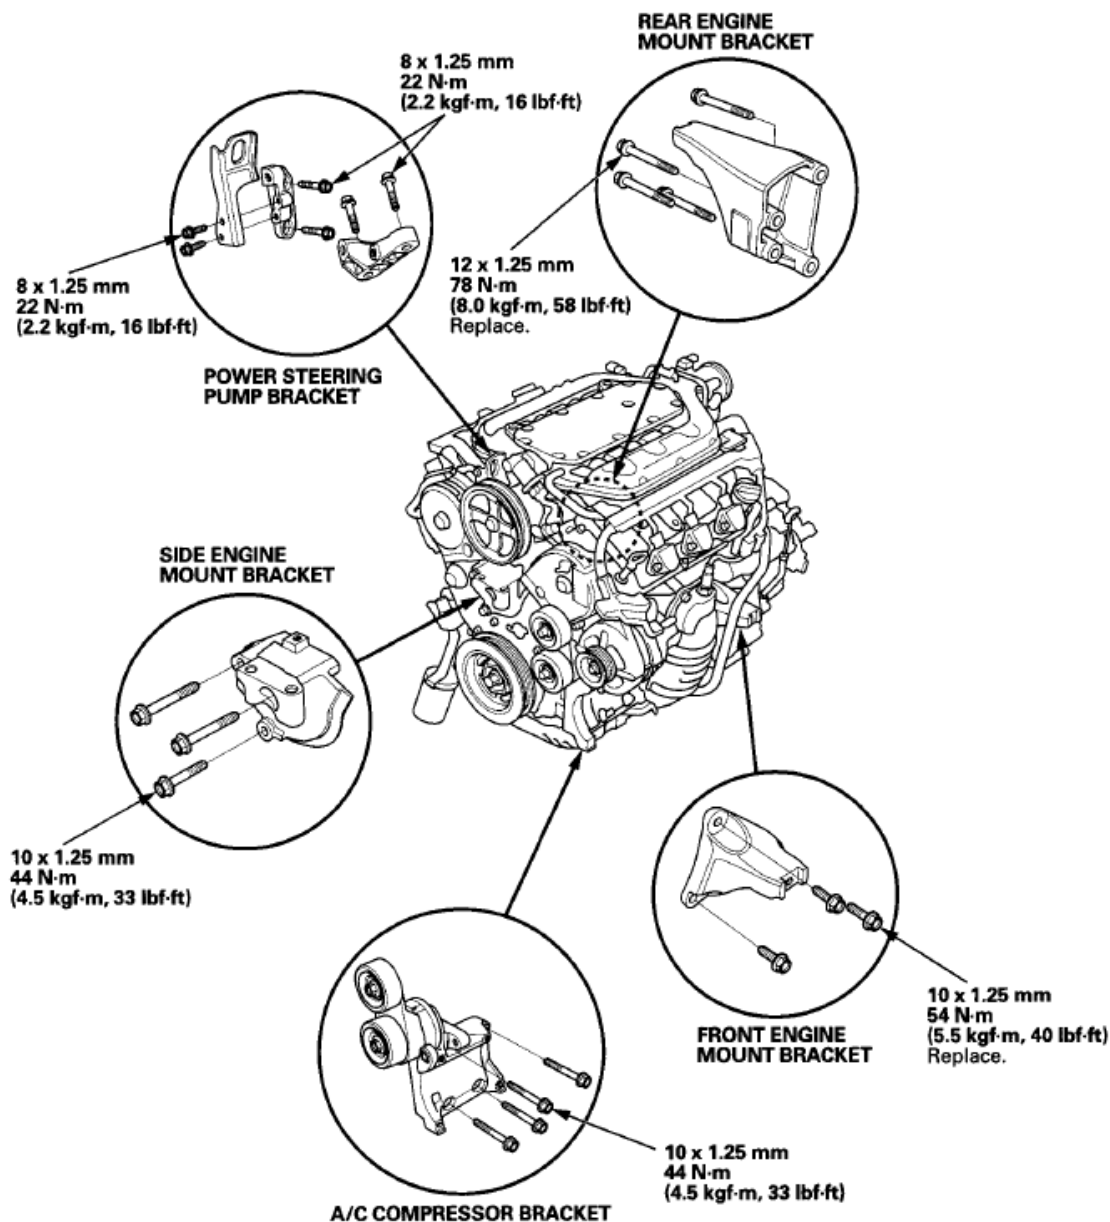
Identifying Accessory Brackets With Torque Specifications
